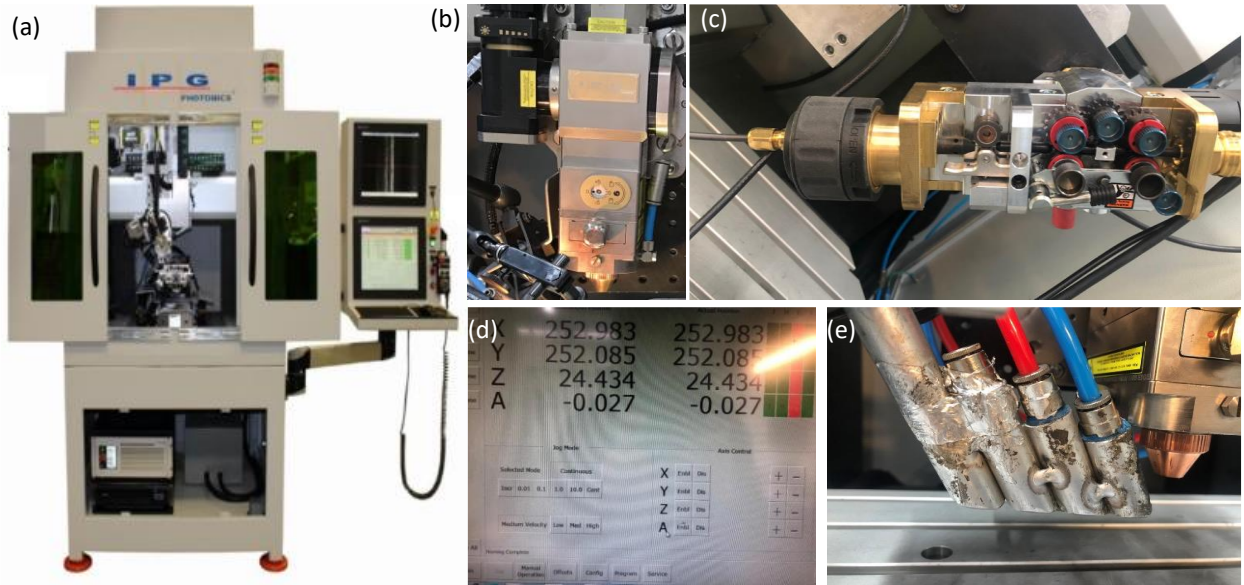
The laser processing system setup of (a) platform overview, (b) laser processing head, (c) wire feeder driven unit, (d) CNC control interface, and (e) shielding pipe.
